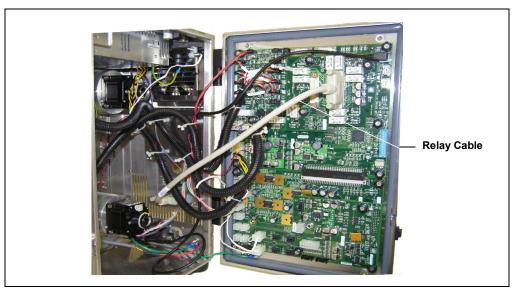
Cable Plugged Into Relay Connectors on the SP TTL/Relay Panel and SP TTL/Relay Controller Board
